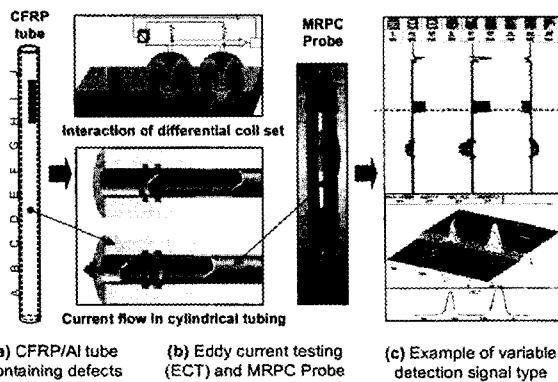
Schematic designs of Eddy Current Testing (ECT) for CFRP tube specimen
